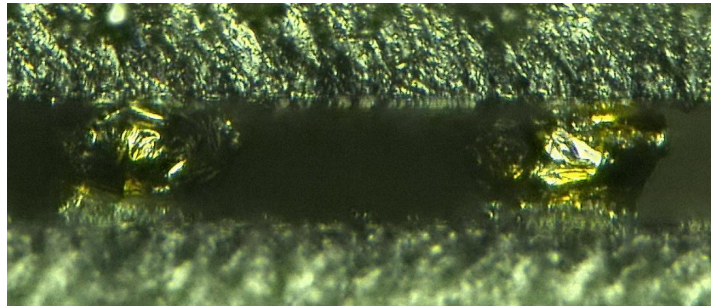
Photograph of soldered assembly with gold studs used as an under bump metallization on the chip and on the substrate.
